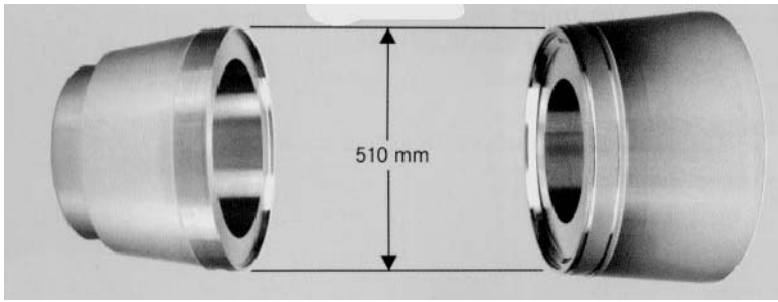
Photo of the two work pieces before inertia welding to create a multistage compressor rotor for an aircraft engine (courtesy MTU)
